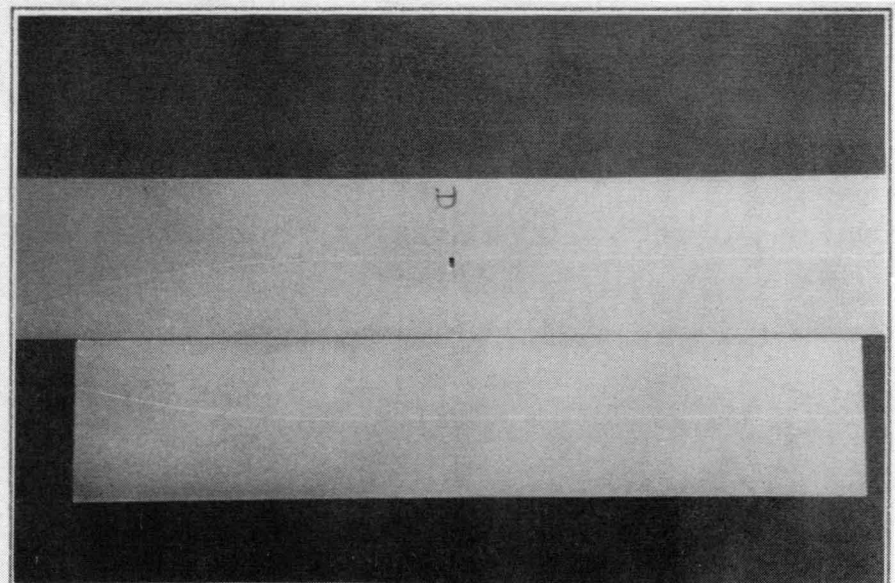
As-wirecut longitudinal sections thru offcut (upper) & sample DG1/M98 (lower)
